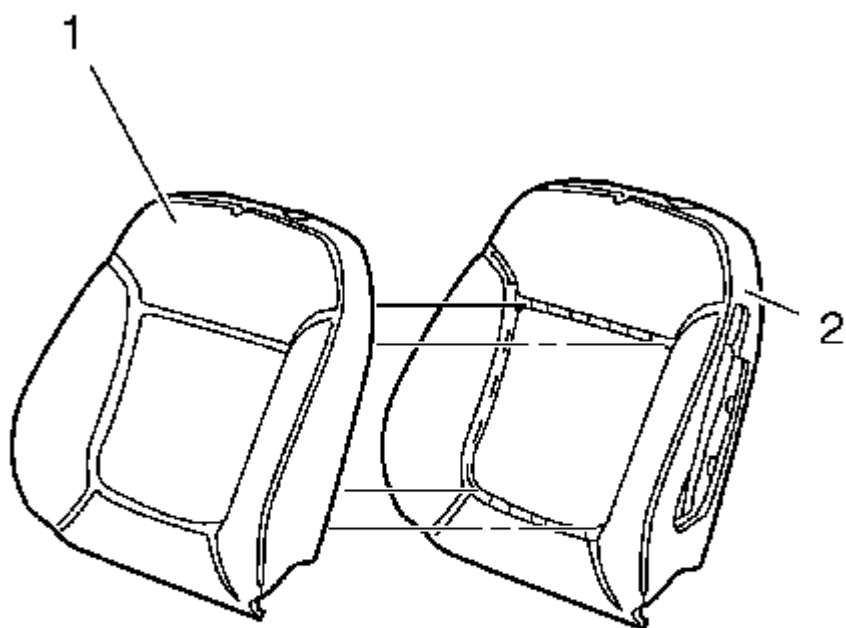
Front Seat Cushion Cover And Cushion Pad
